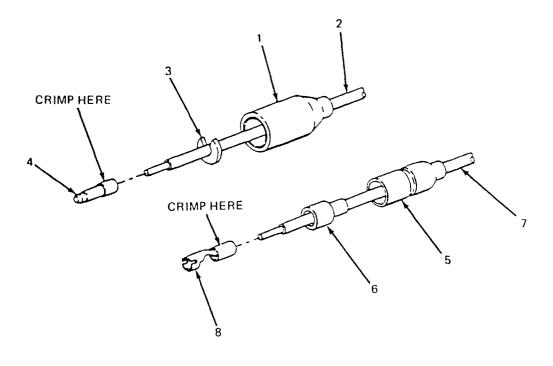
Taillight Cable Assembly and Electrical Lead Repair.
